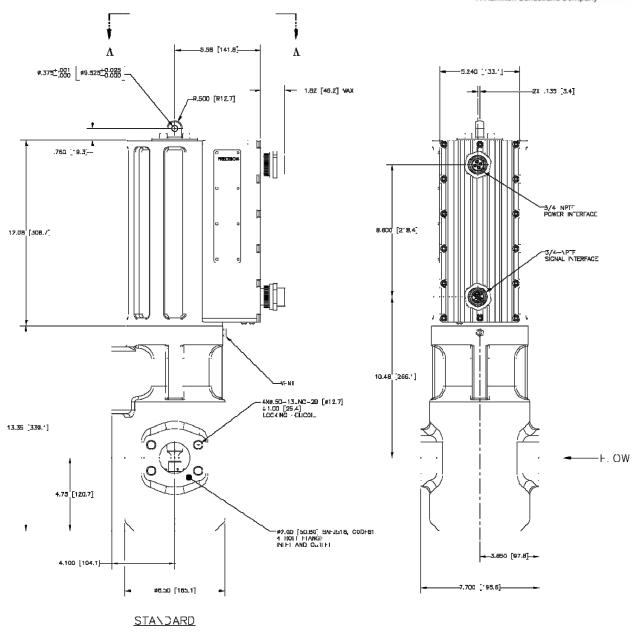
HFG2.0 Dimensions, 1-Piece Housing
